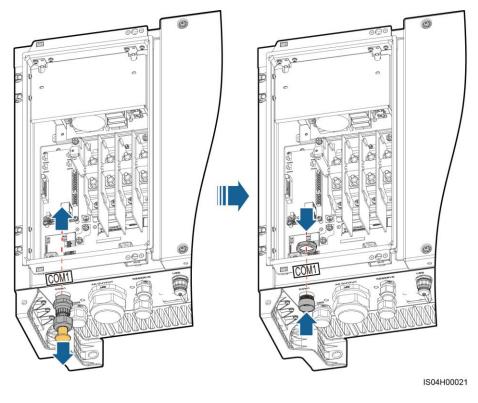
Installing the tube fitting (using COM/RESERVE as an example)
